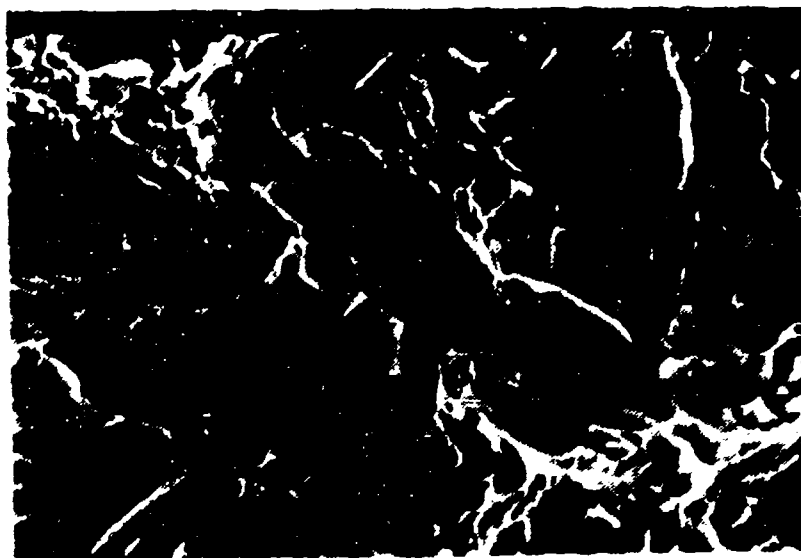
Fracture Surface of Hourglass Specimen No. 6
